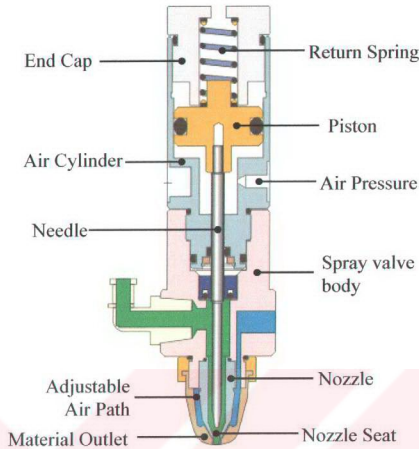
Cross-sectional view of the TS5520 Spray Valve
